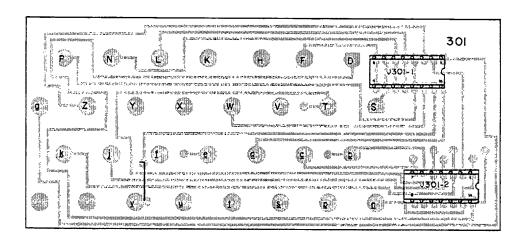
P.C. BOARD ASSEMBLY, BOARD 301, DRAWING
